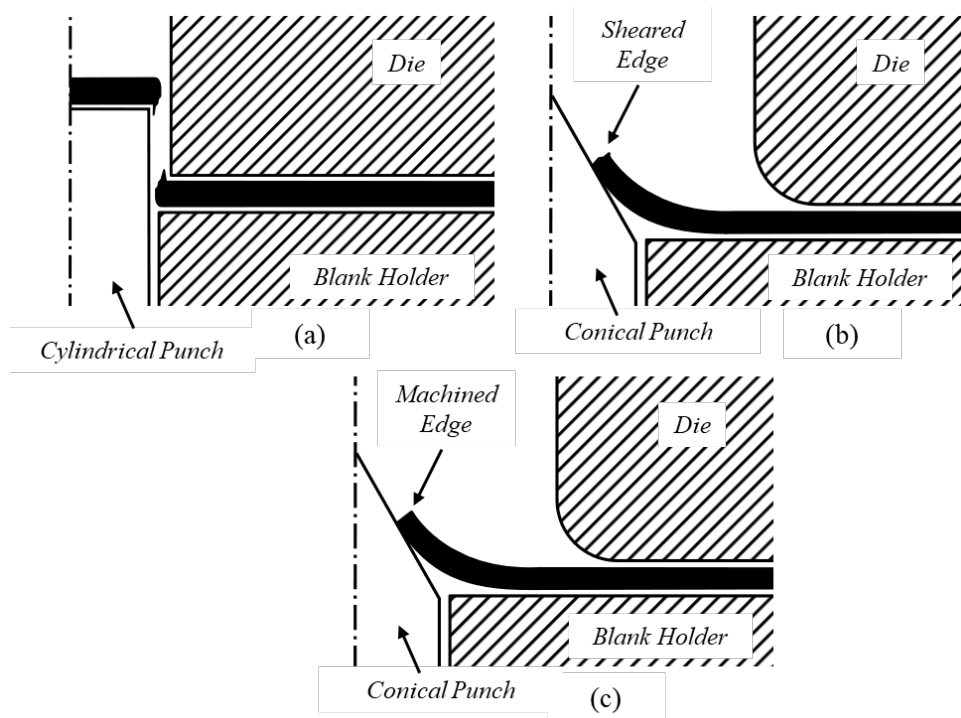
Axisymmetric views of (a) hole shear cutting and (b) conical punch hole expansion as described by norm ISO 16630 for sheared edge flangeability characterization [1]. Axisymmetric view of (c) conical punch hole expansion for uniaxial tensile fracture strain characterization as described by Pathak et al. [12].
